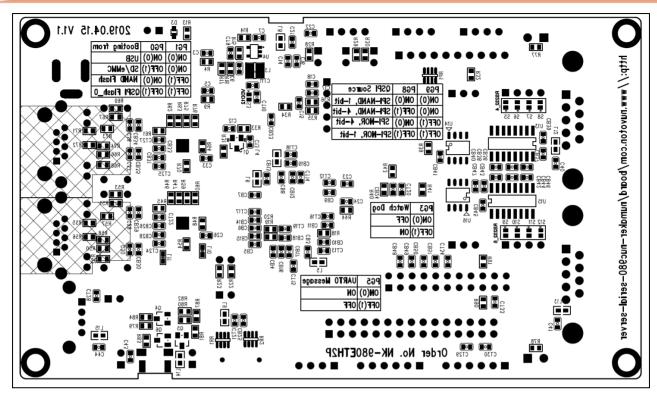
NuDesign NK-980ETH2P Demo Board Front PCB Placement
